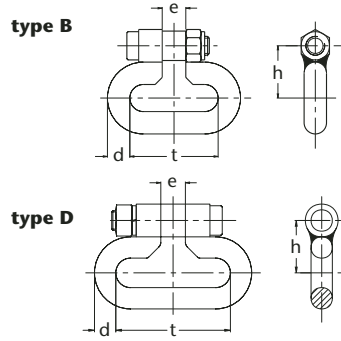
Chain locks type B with welded nut and type D with loose nut.
